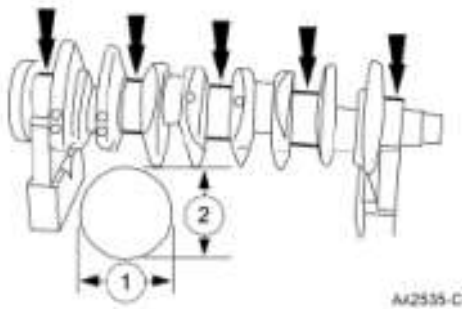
Measuring Crankshaft Main Bearing Journal Diameters
